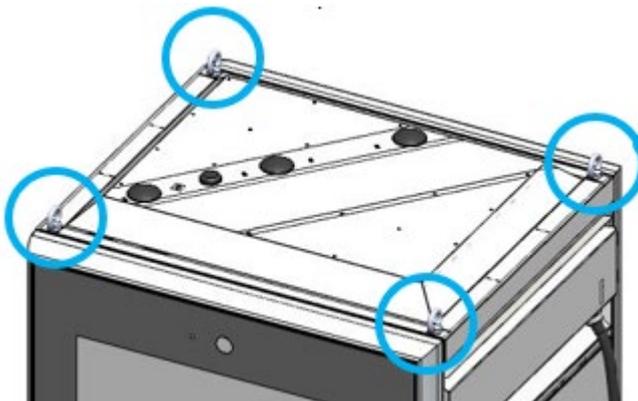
SCREW CONNECTION IN DETAIL (DETAIL FROM CONSTRUCTION DRAWING)
